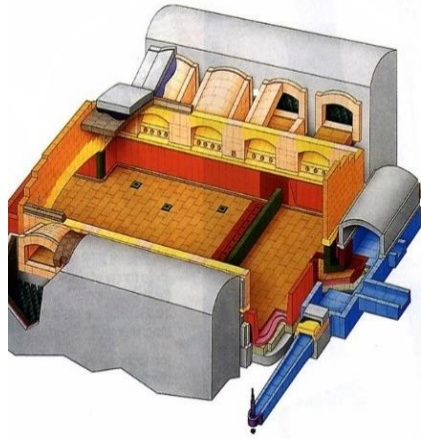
Glass tank furnaces [3], Figure 2. Inside of glass tank furnaces [4].
